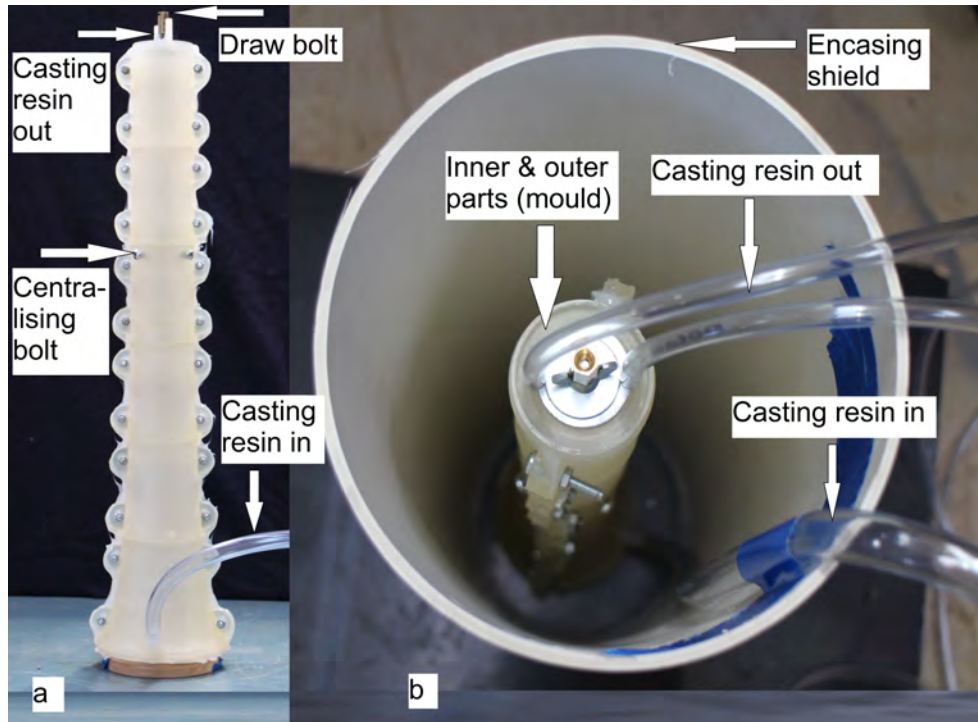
Photograph of a. mould b. mould inside encasing shield.
